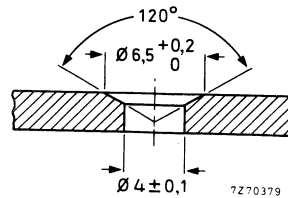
Shape of hole for 500 V insulation, nut fastening.
